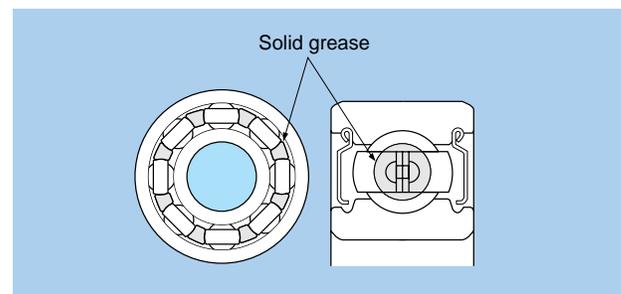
Deep groove ball bearing with spot-pack solid grease (Z shield) (Standard for deep groove ball bearings)
